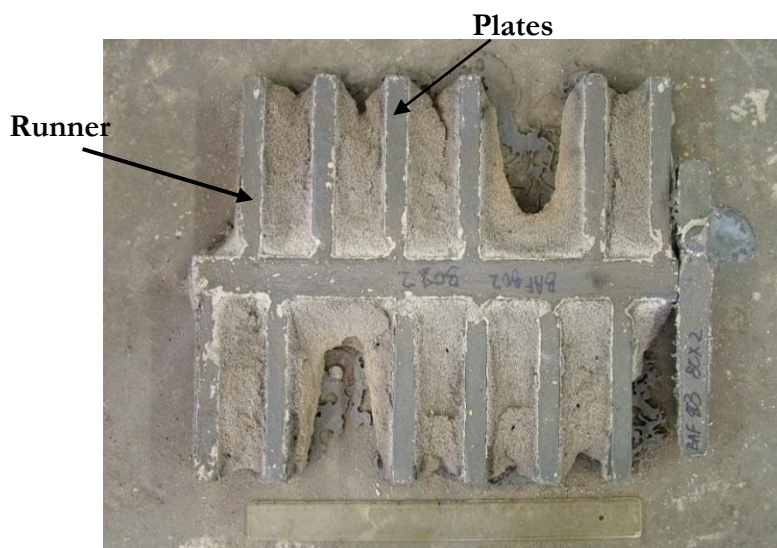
Photograph showing a rectangular wear test plates, the runner and risers.
